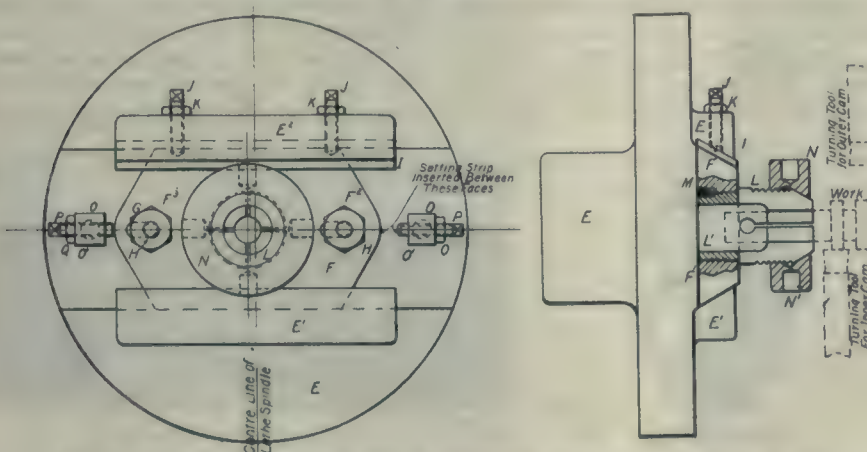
FRONT AND END VIEW OF FIXTURE FOR THIRD OPERATION.
